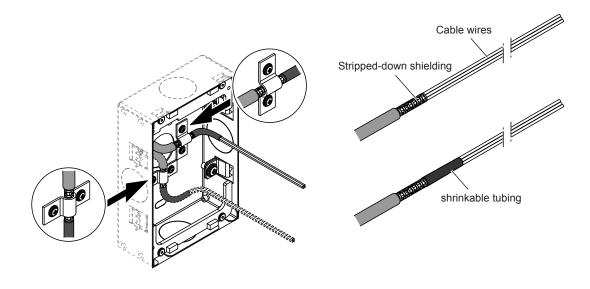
Fix the CAN BUS cable(s) with exposed shielding to the housing with the shielding clamp(s)
